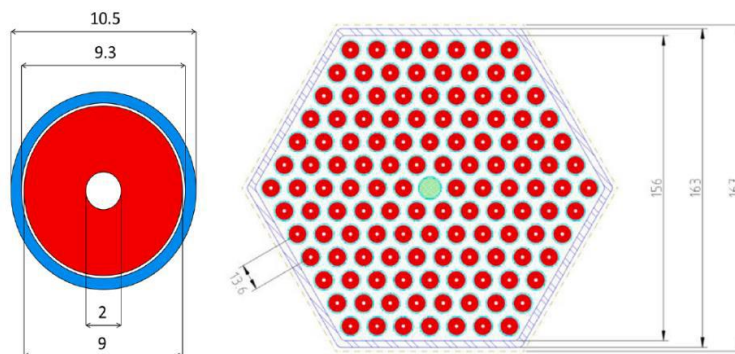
Fuel Pin and Fuel Assembly sketch [44]
